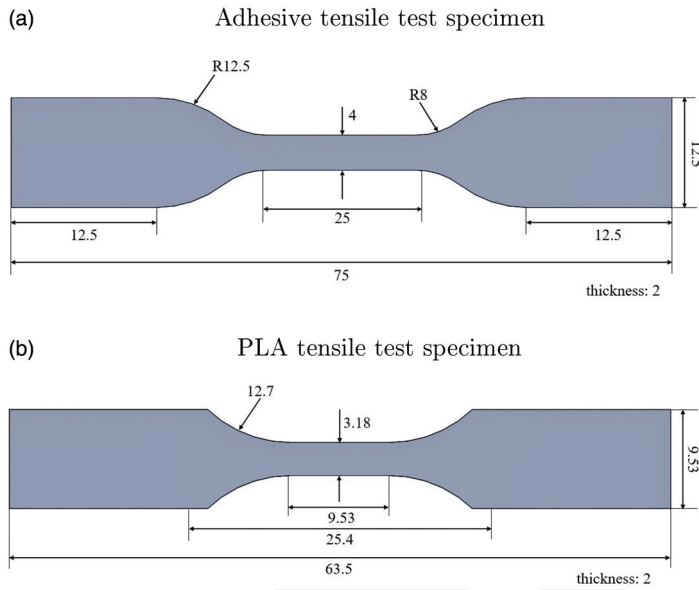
Dimensions of (a) adhesive and (b) PLA tensile test specimens (all dimensions in mm).
